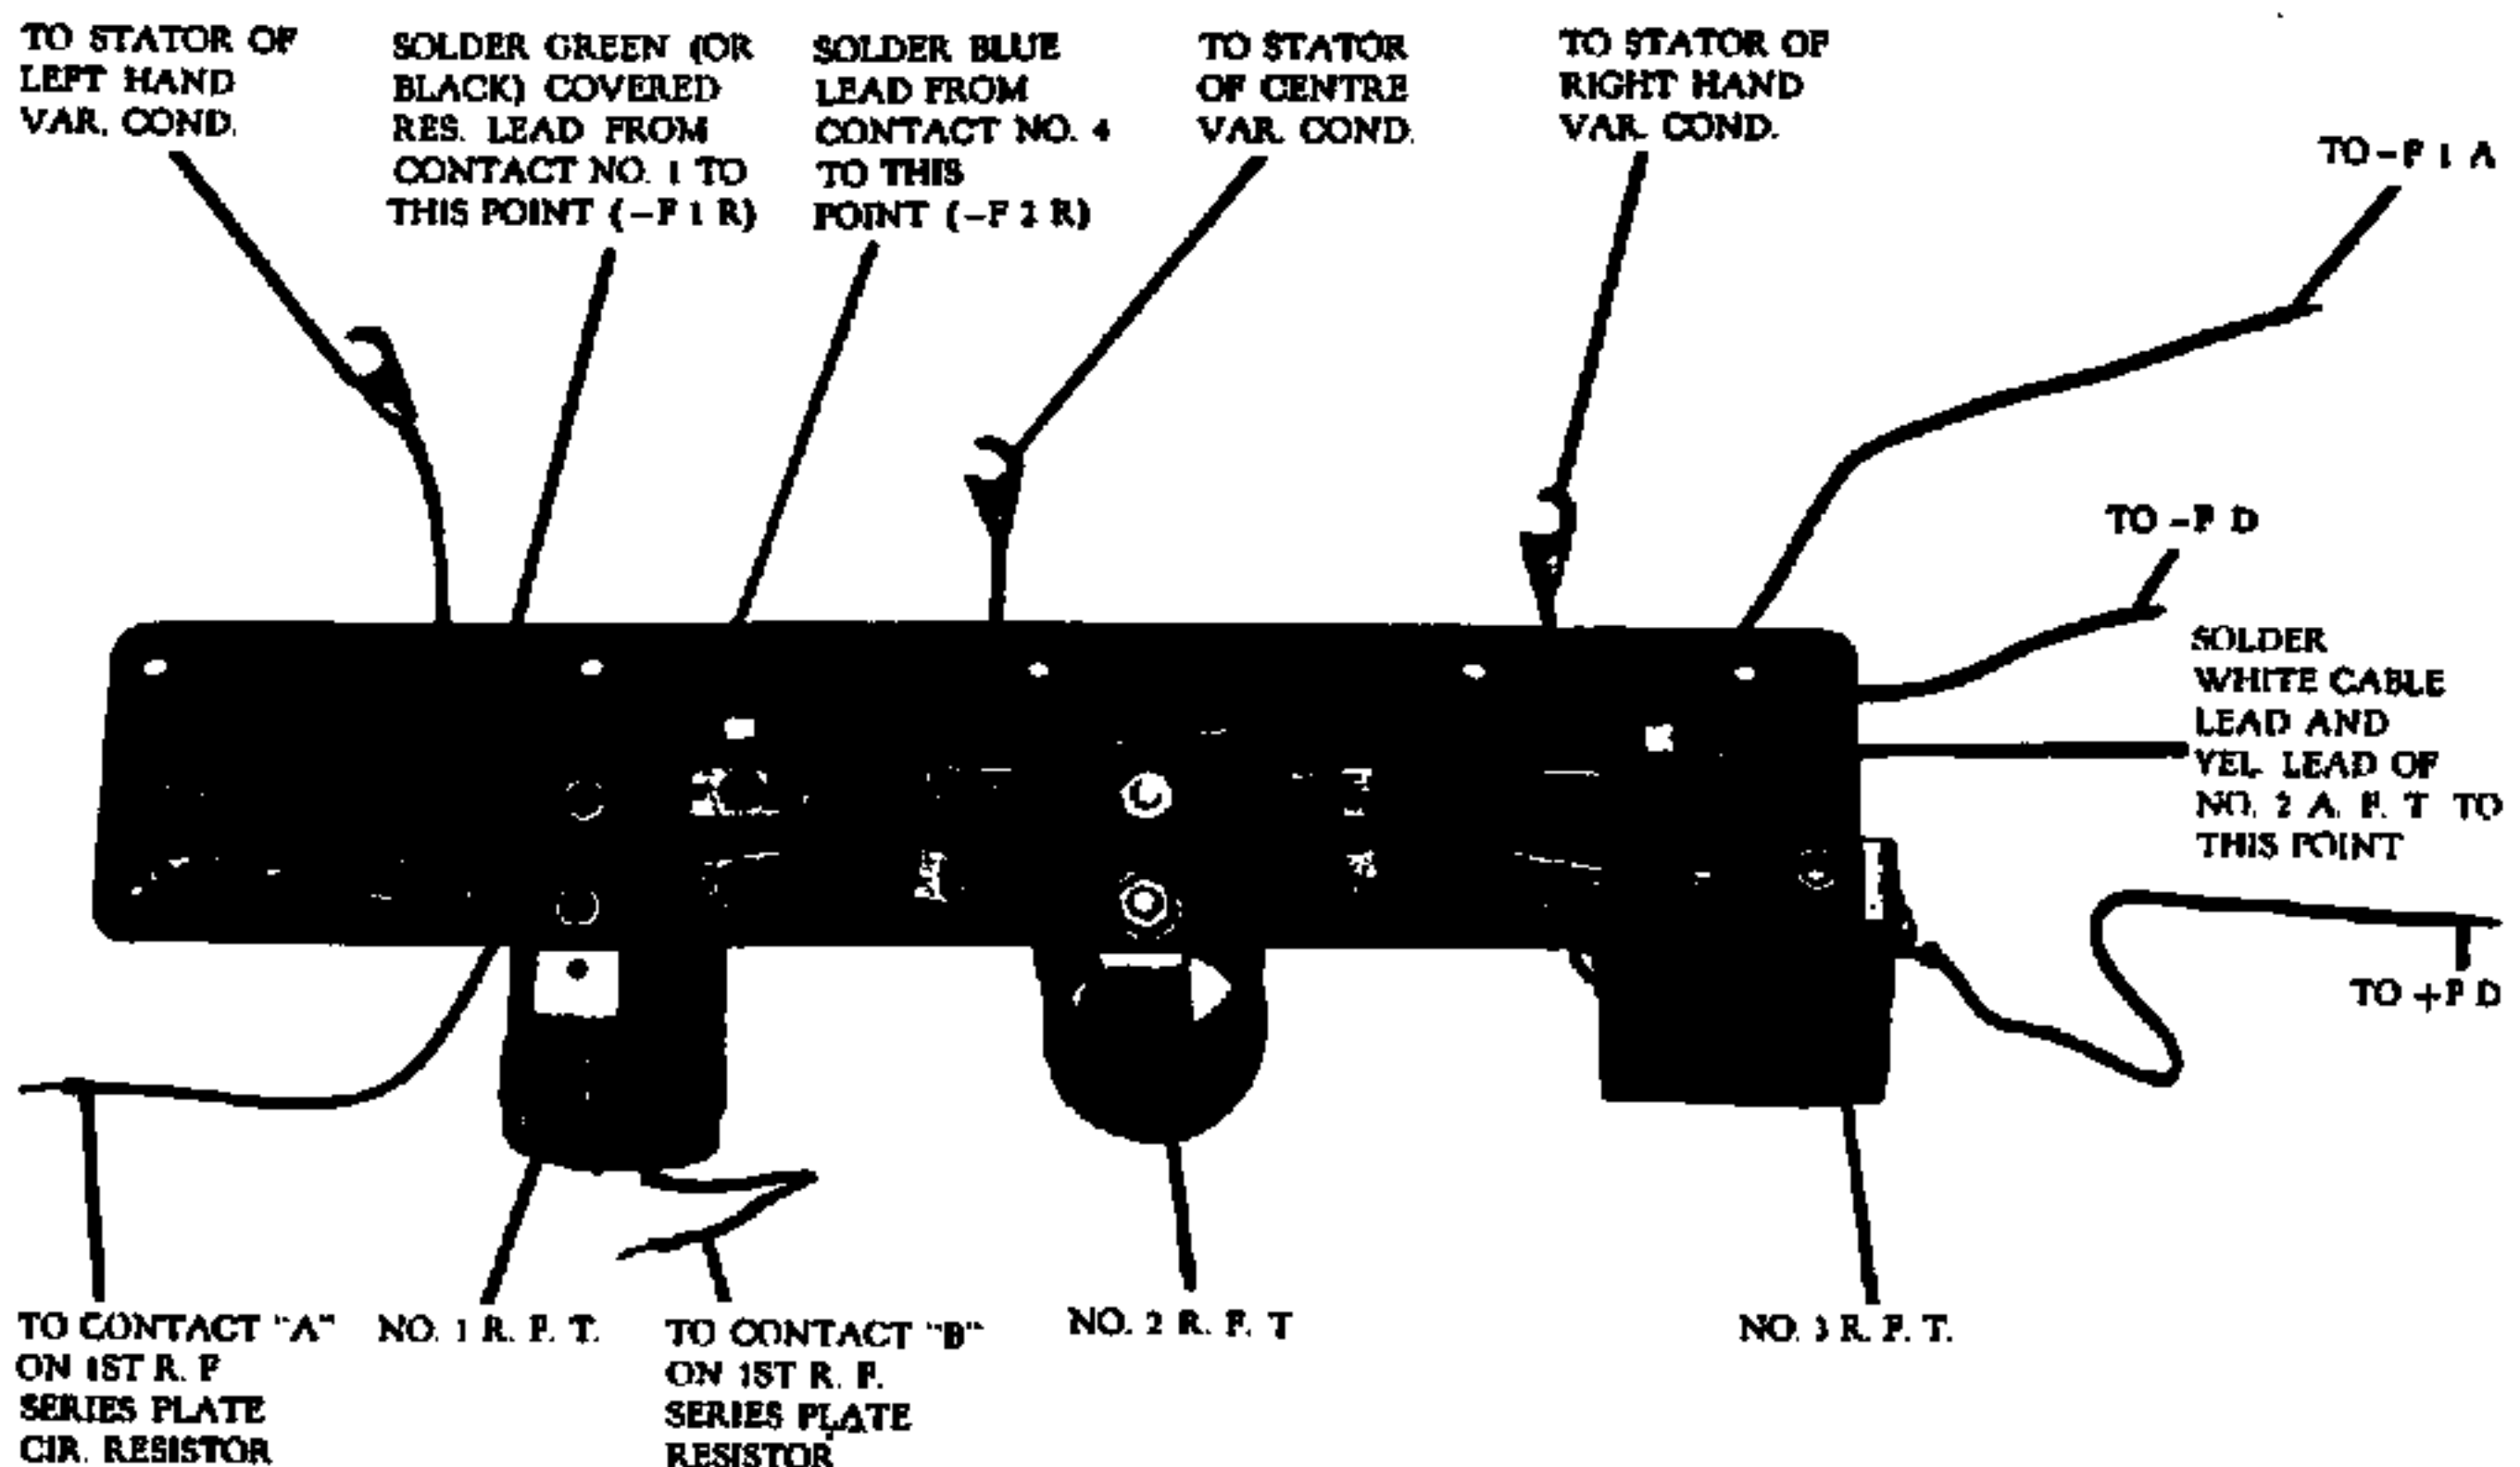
VIEW OF R.F. AMPLIFIER ASSEMBLY.
